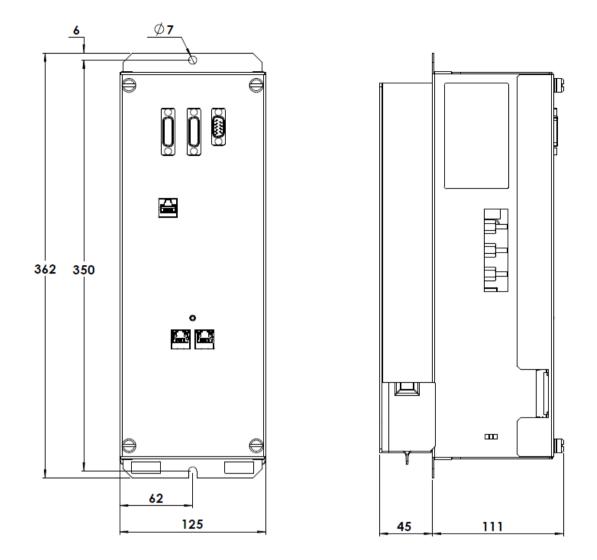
35A and 35AH Drive dimensions (without IO Interface) Recessed mount
